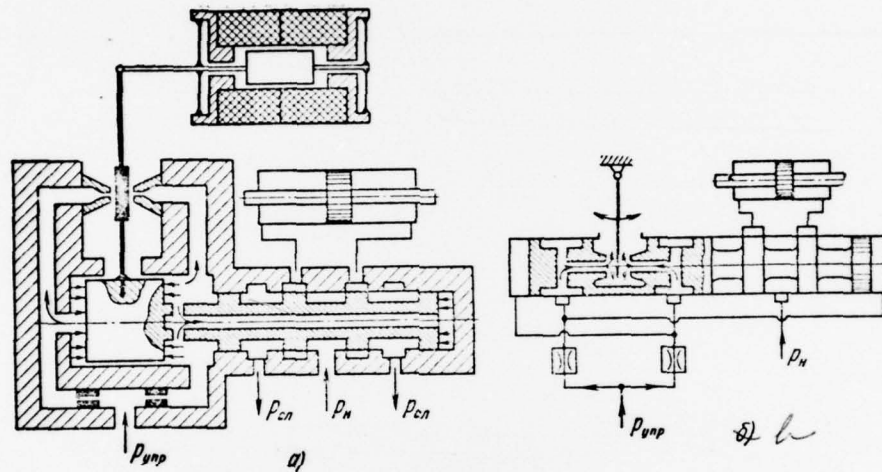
A distributor of the type "nozzle" - shutter/valve with control on pressure.
